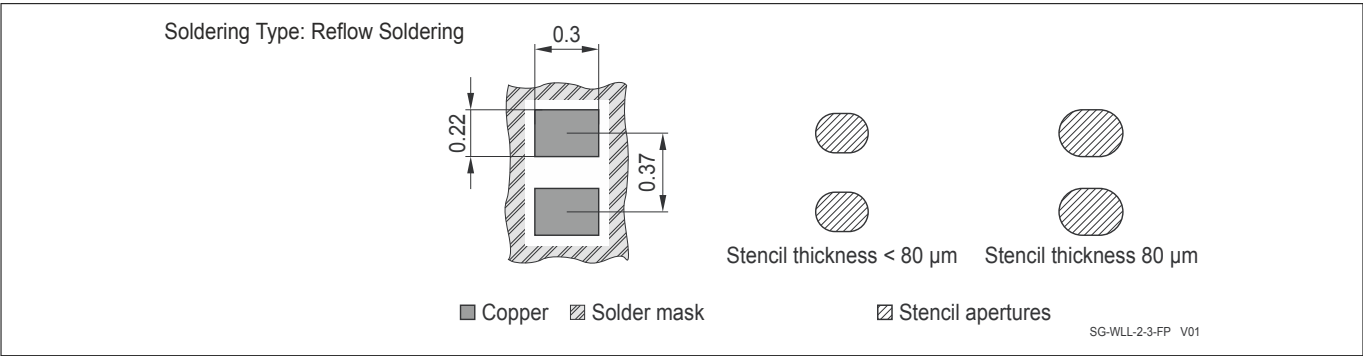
WLL-2-3 footprint (dimension in mm), recommendation for Printed Circuit Board Assembly see [2]
